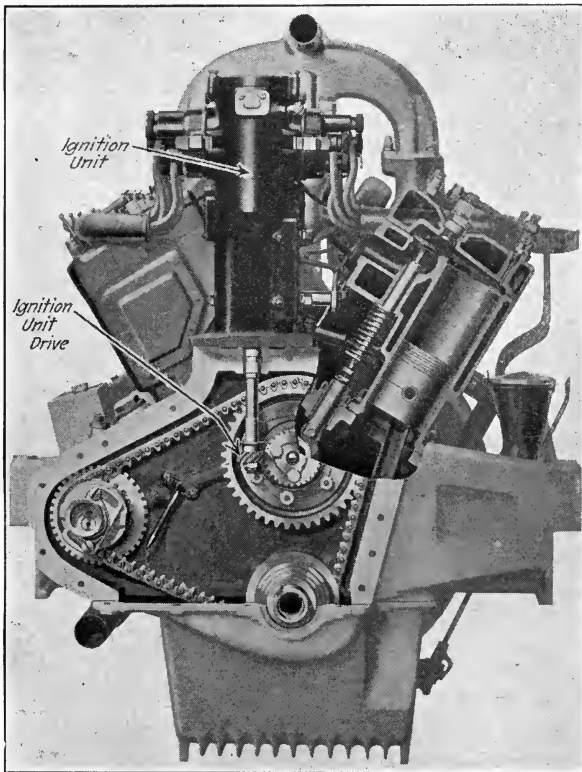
Front view of Packard Twin Six engine showing ignition unit drive.
